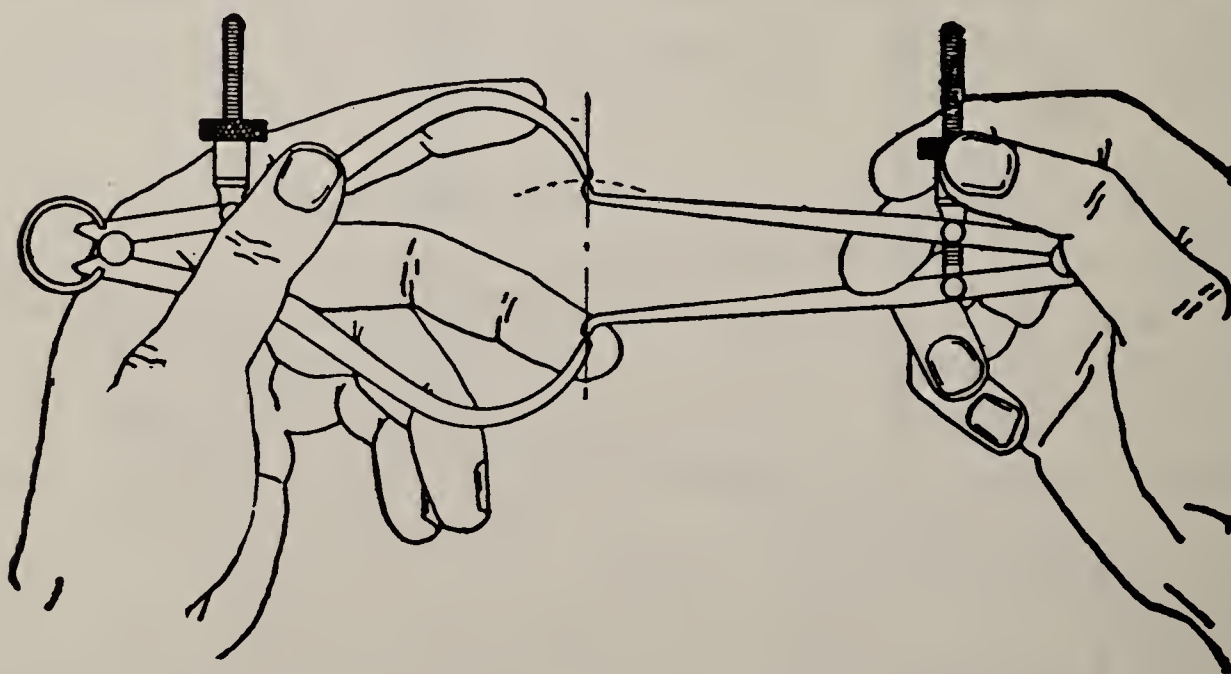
Method of transfer of measurement from an inside to an outside caliper.
